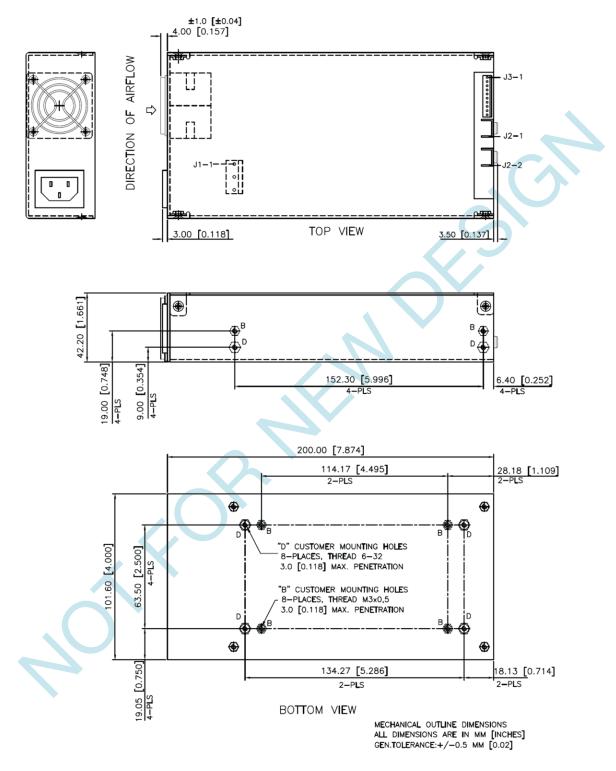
Mechanical Drawing (With Side Fan Mounting)
